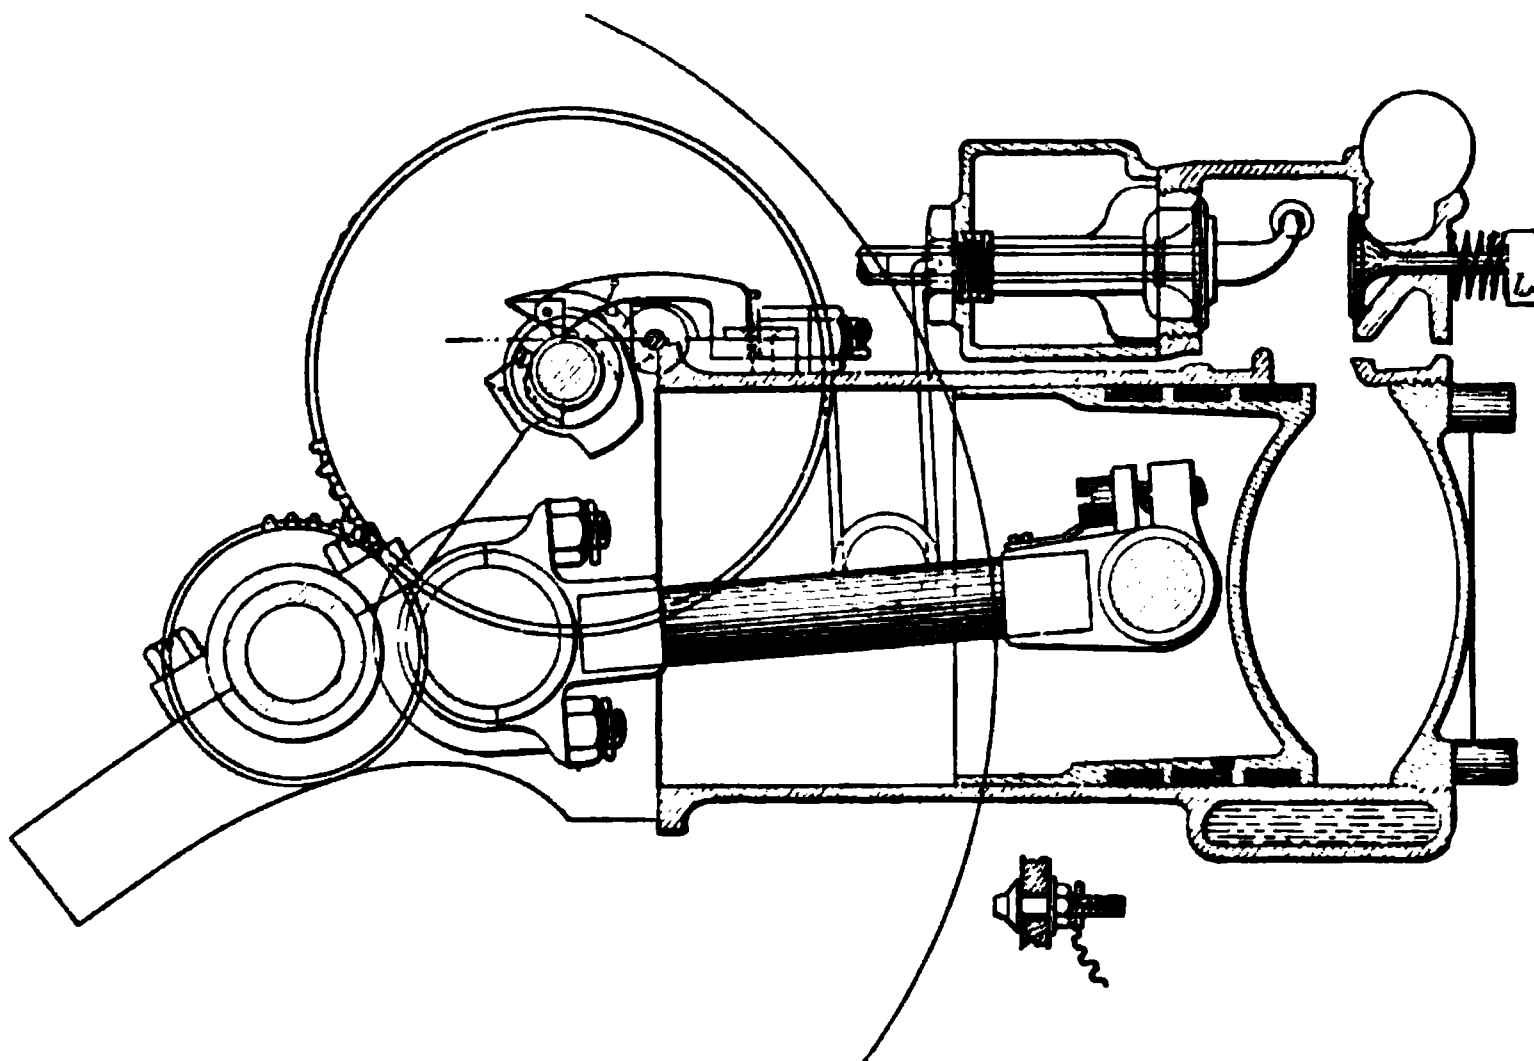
Sectional View through one Cylinder of the Duryea Carriage Motor, showing working parts. The exhaust cam operated by a 2 to 1-gear system from the main shaft, imparts a double motion to the valve pushrod; a lift for opening the valve, and a double twist for making and breaking the connections of the electrical spark. The valve and sparking chamber is projected so as to show the position of contained mechanism on a plane different from that of the cylinder section. Details of the insulated sparking anvil are shown below the cylinder. It is an iron contact point, having a mica washer on the inside and the outside of the cylinder walls, and a mica bushing between, so as to perfectly insulate it from the metal of the engine. A very short water jacket and the concave cylinder and piston heads are also exhibited in this figure.
